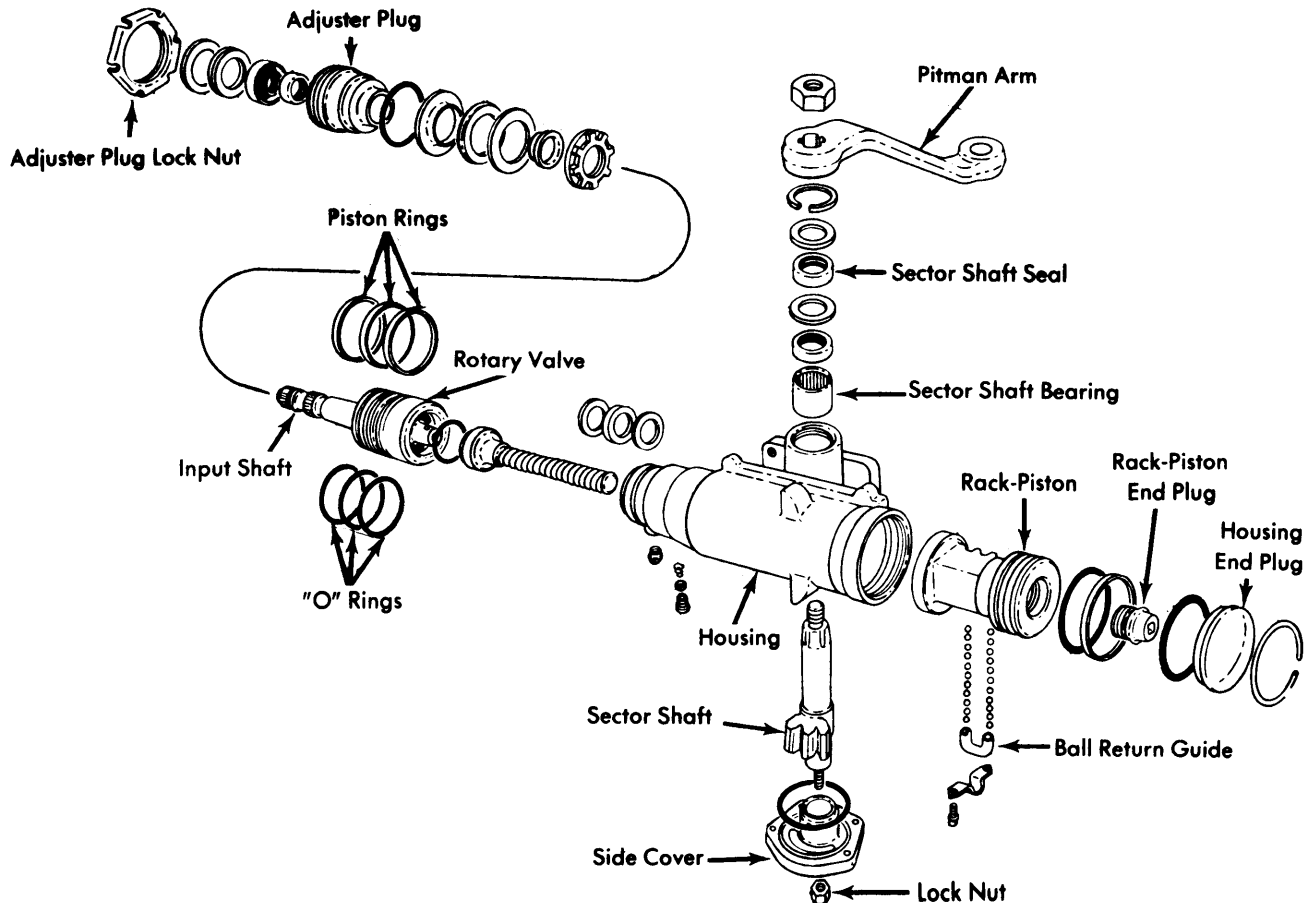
Disassembled View of Saginaw Power Steering Gear
